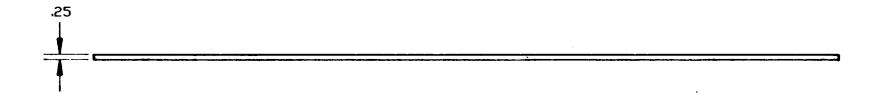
Tool Box Rack Assembly Part Number 20089720-8 (Sheet 8 of 11)
